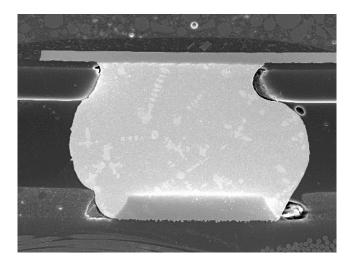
Cross Section of Solder Joint Showing Excellent Wetting with Soak Profile.
